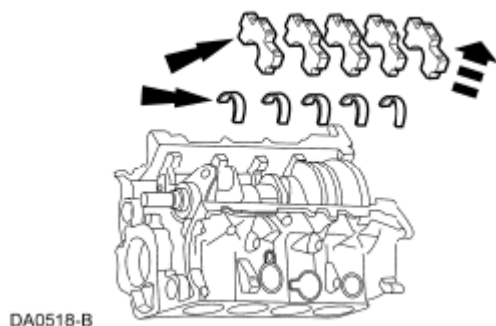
Locating Main Bearing Caps, Lower Crankshaft Main Bearings And Lower Thrust Washer
